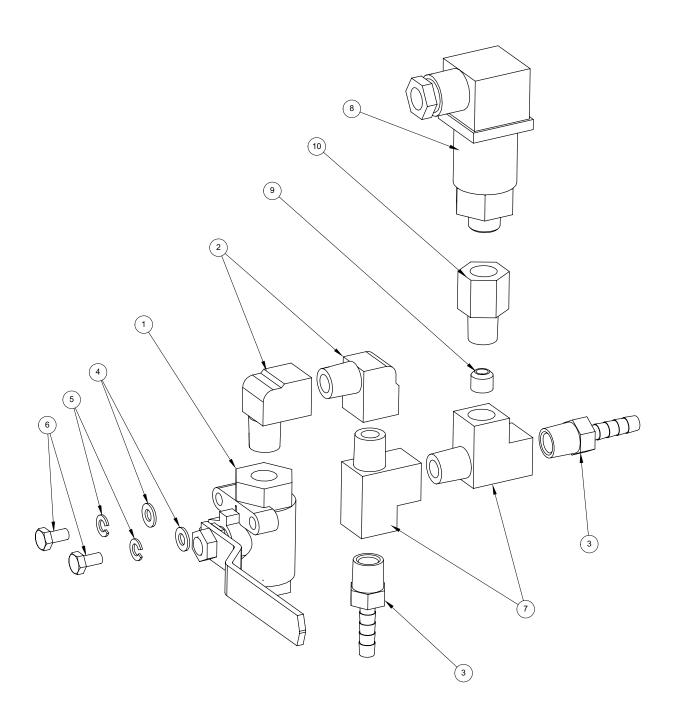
HI-PSI Manifold Assembly C-6158 Rev -
